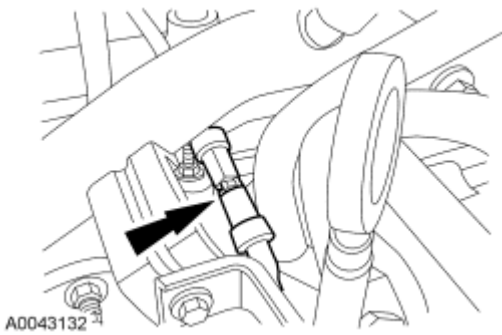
Locating Coolant Reservoir-To-Engine Supply Hose
